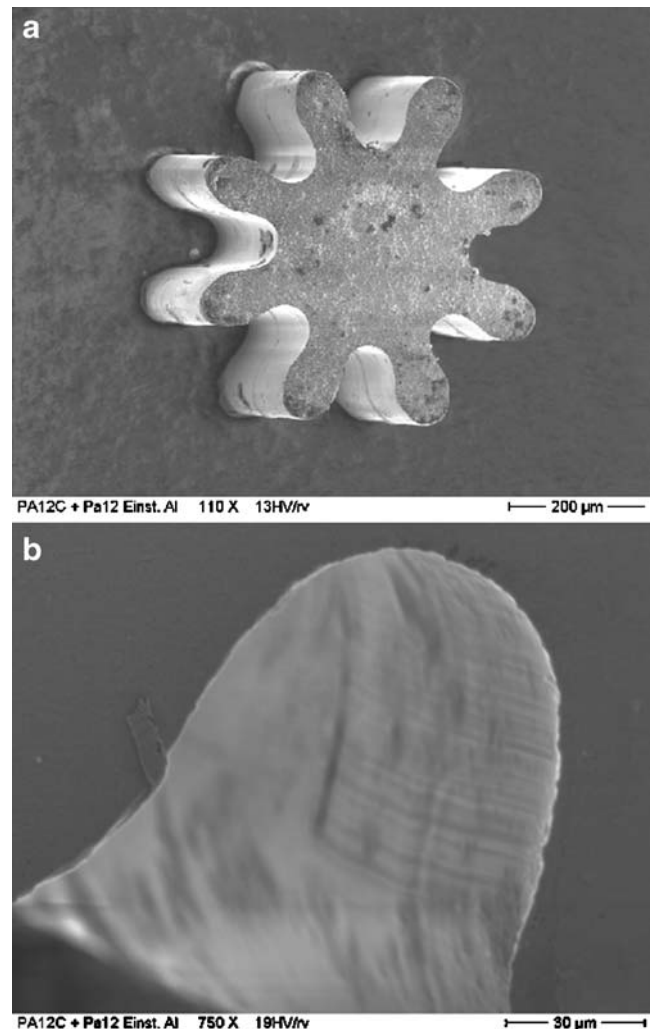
a, b SEM pictures of microgear wheels produced by improved process chain of 2C injection moulding and electroplating
